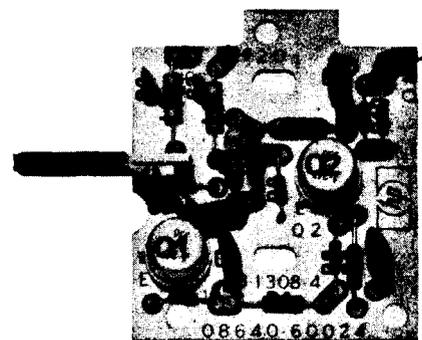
B. A3A1A2 Divider/Filter Buffer Amplifier Board Assembly (Errata)
